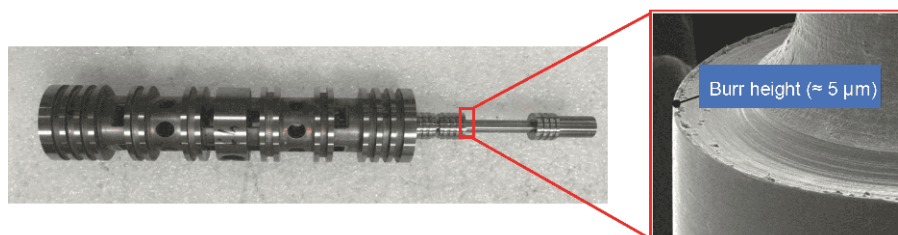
(Color online) Burr appearance and size on the precision working edge of the servo valve core.
